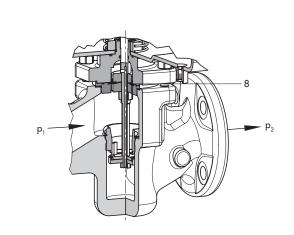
Type 2405 Pressure Reducing Valve with pressure balancing · Nominal size DN 32 to 50 · Set points 0.005 to 0.060 bar · Flow-to-open (two-step control mode)
